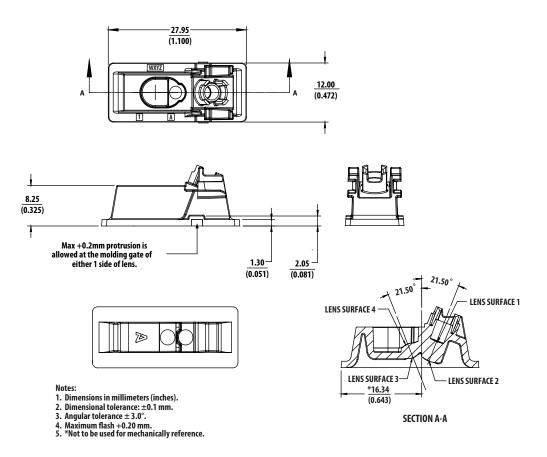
ADNS-6130-001 laser mouse trim lens outline drawings and details.
